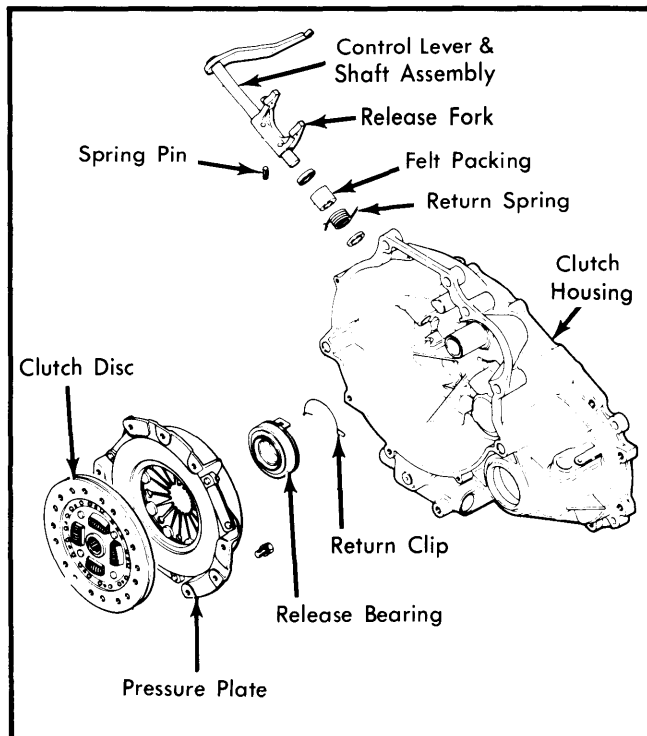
Exploded View of Champ & Colt Clutch Assembly
